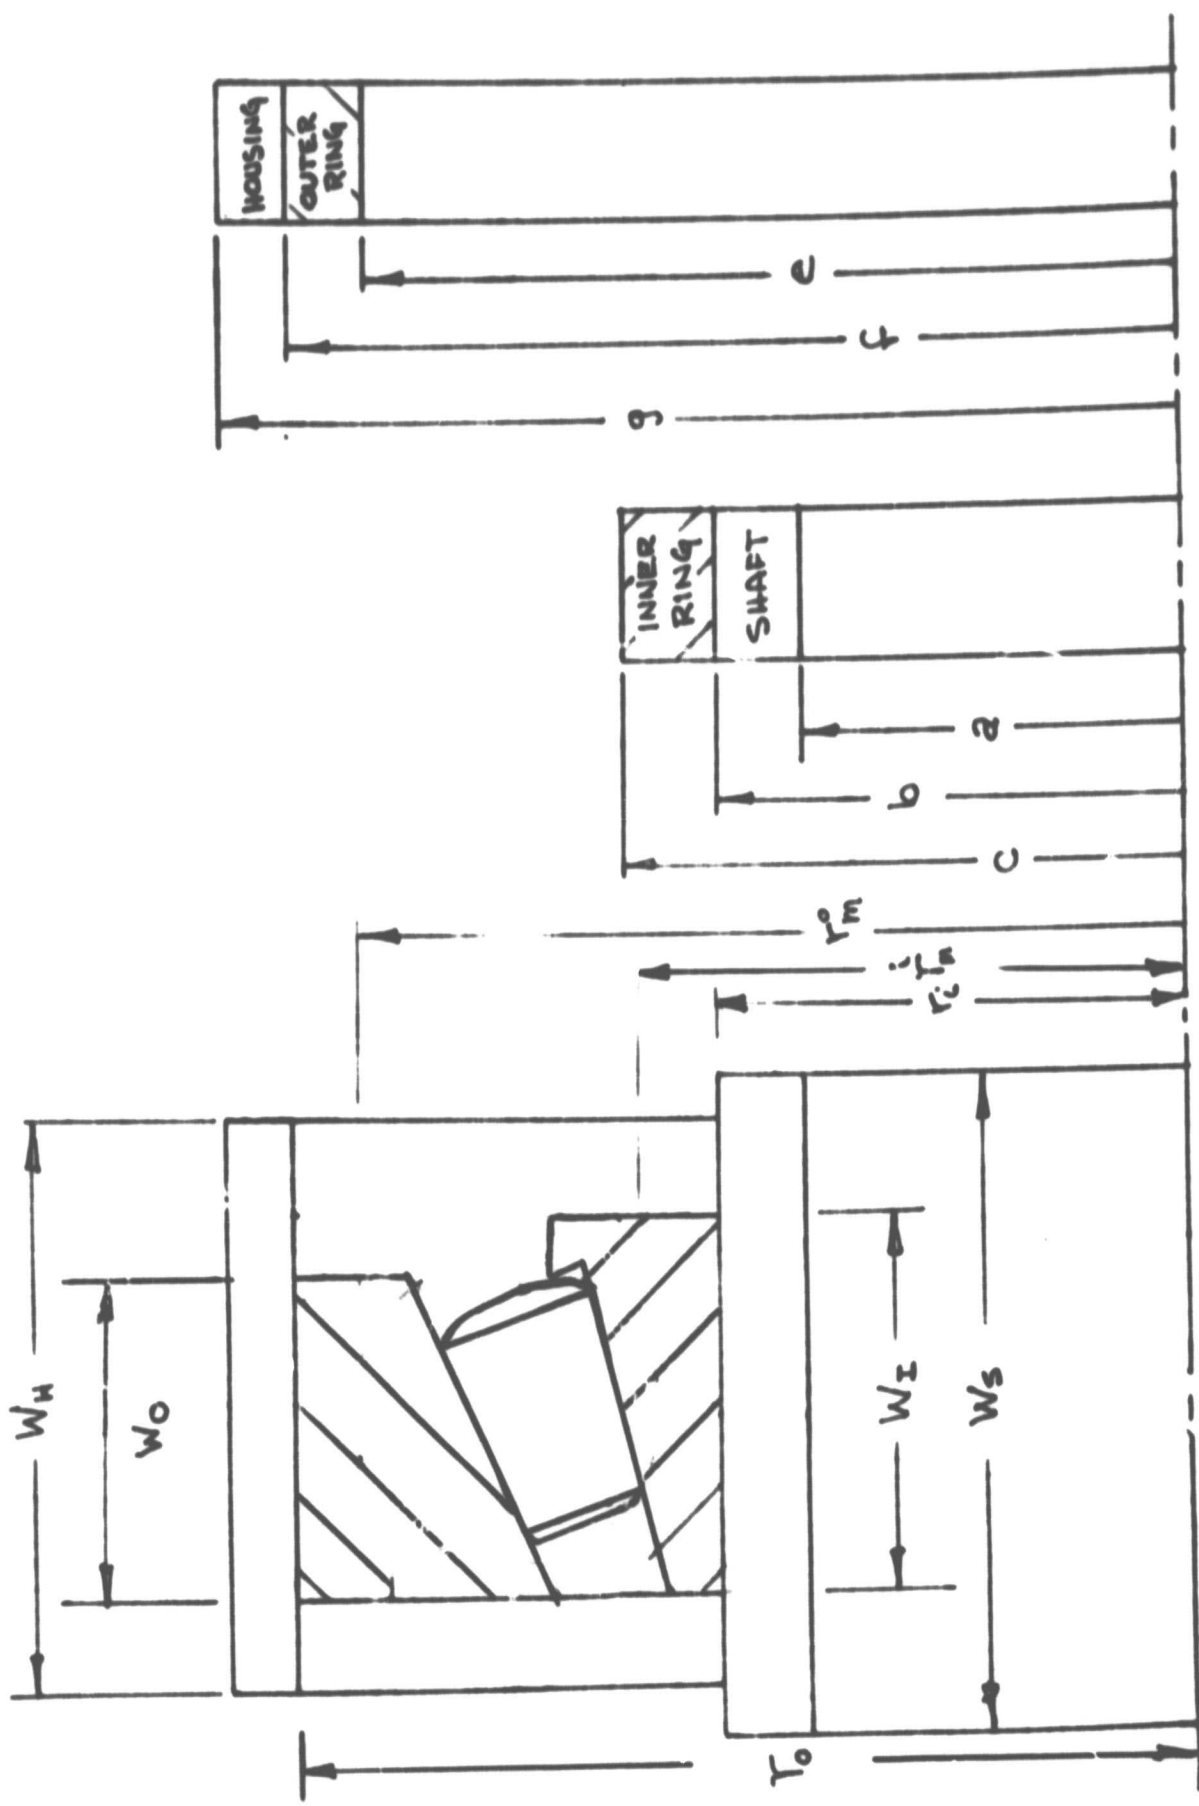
Fit Analysis-Bearing Assembly Equivalent Sections
